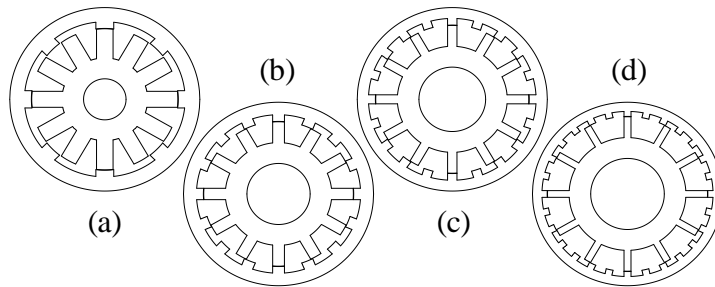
Final exterior rotor design cross-sections (without tapering/filletts):
